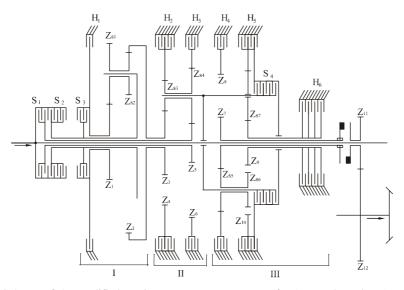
Scheme of the modified Ravigneaux system as a part of a 19-speed gearbox 'powershift' type applied by John Deere [1992] manufacturer in the tractors of the series 7000 – part III
